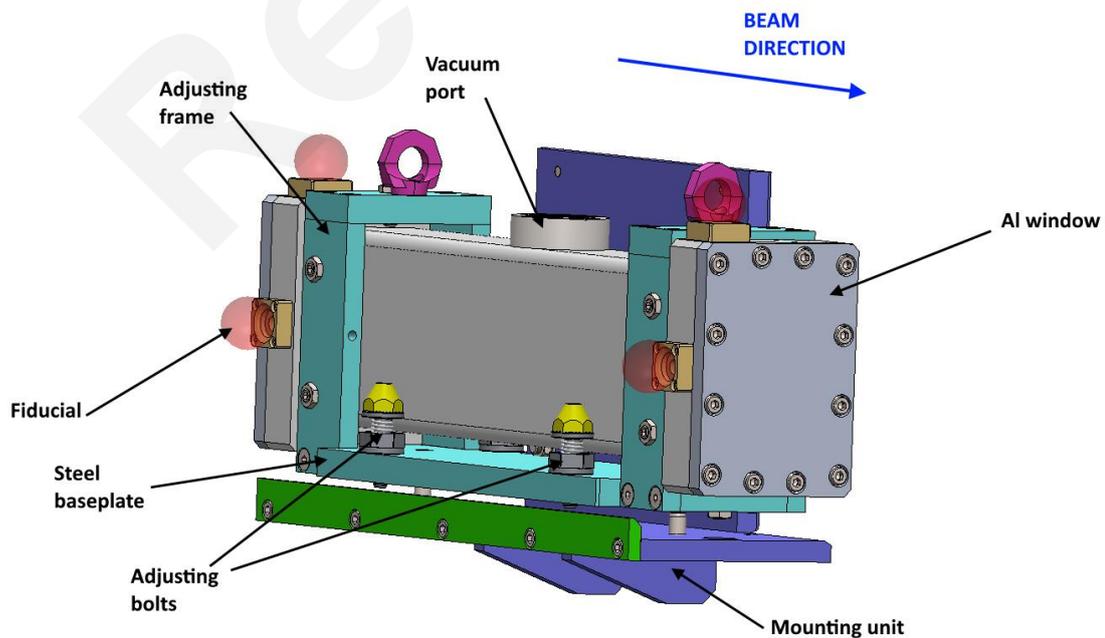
Overview of W02-13 vacuum housing assembly and description of individual parts.
